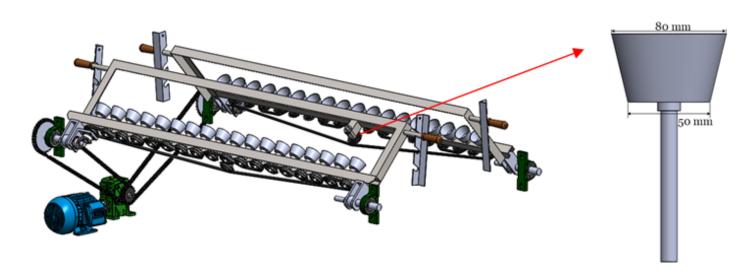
The schematic transmission system of the bamboo cooking device and bamboo container design
